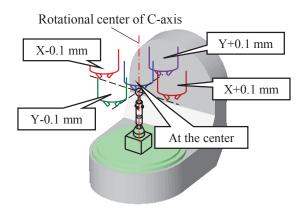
Measurement with positional error of *C*-axis rotational center.
